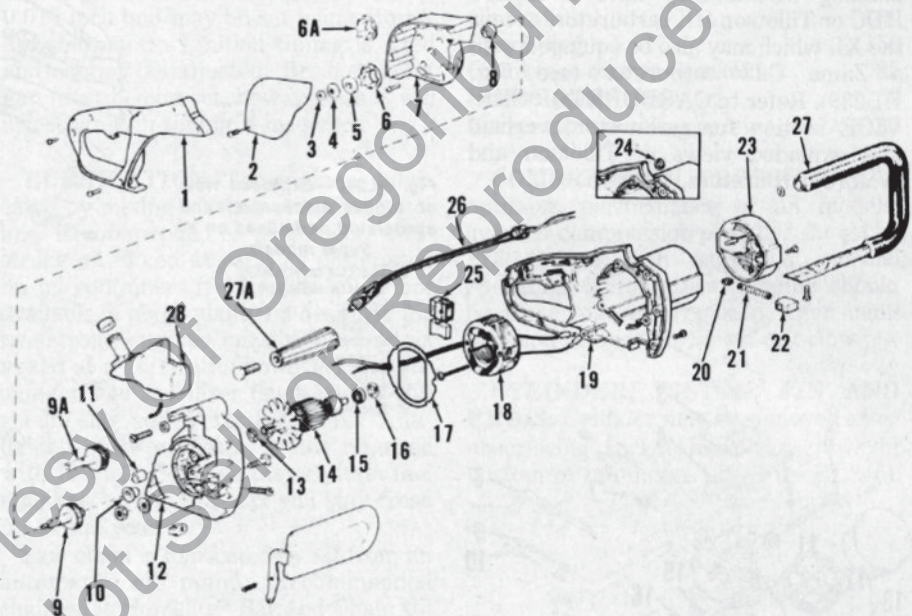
Exploded view of XEL electric chain saw. Components 6A, 9A and 27A are used on XEL 8 and XEL 10 saws.
